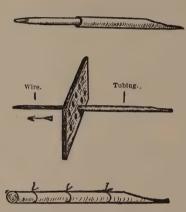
Shows how copper wire is introduced into tube. Point of wire sticking out.
